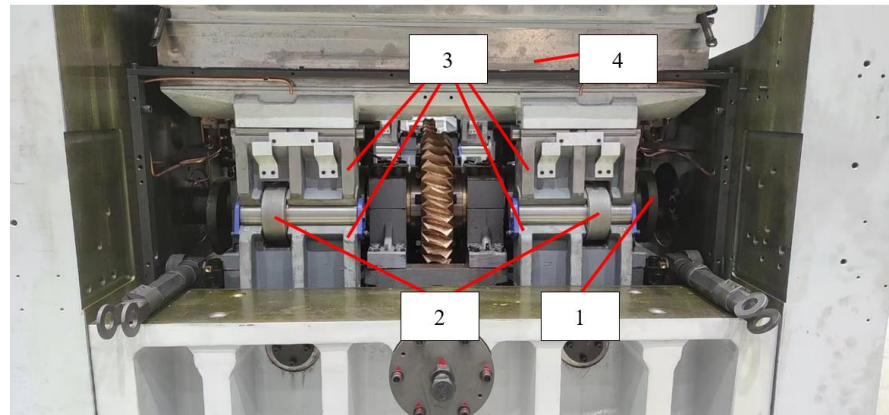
Application diagram of fully symmetrical lightweight drive rod. 1-crankshaft; 2-power rod; 3-lightweight drive rod; 4-moving platform.
